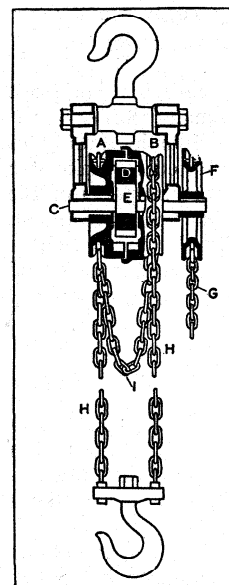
MOORE AND HEAD PULLEY BLOCK
